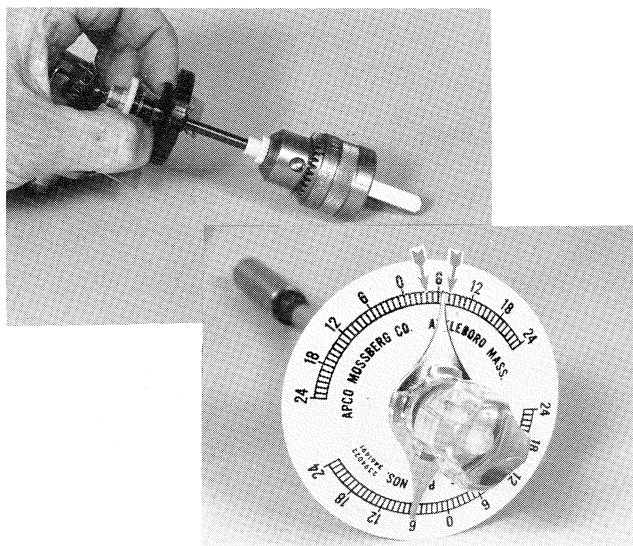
Measuring Sensor Drive Crank Clutch Torque
